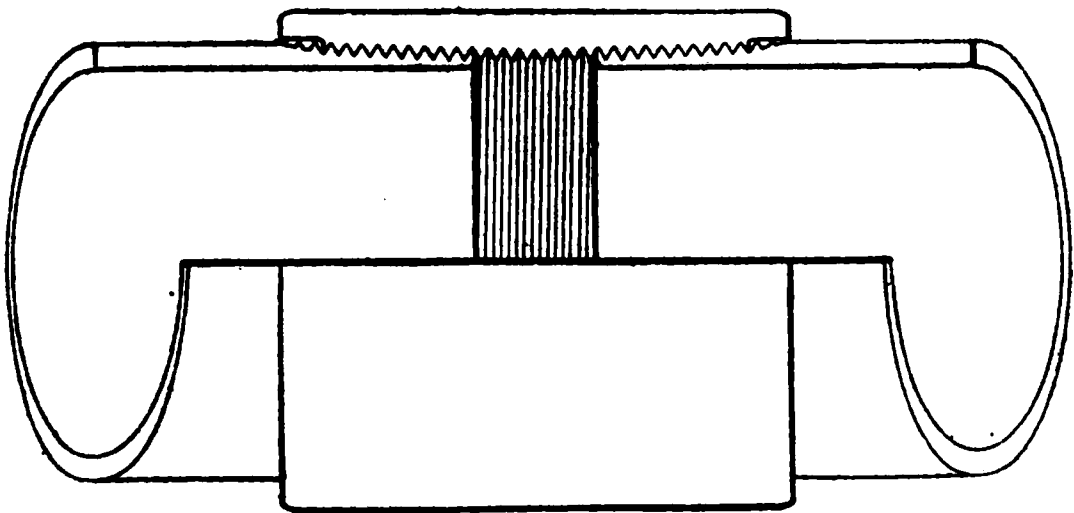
Typical Section of Line Pipe Coupling and Joint
